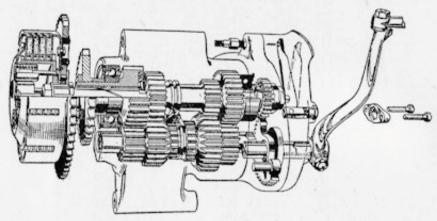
1938-9 Burman Four-speed Gearbox with Enclosed Kick-starter and Clutch Mechanism
